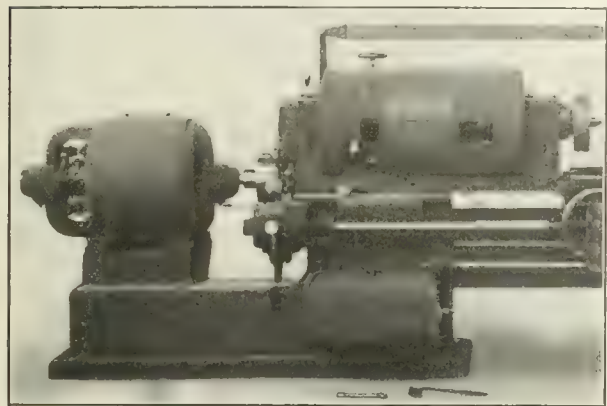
Fully Inclosed Gears of 24-in. Headstock.
